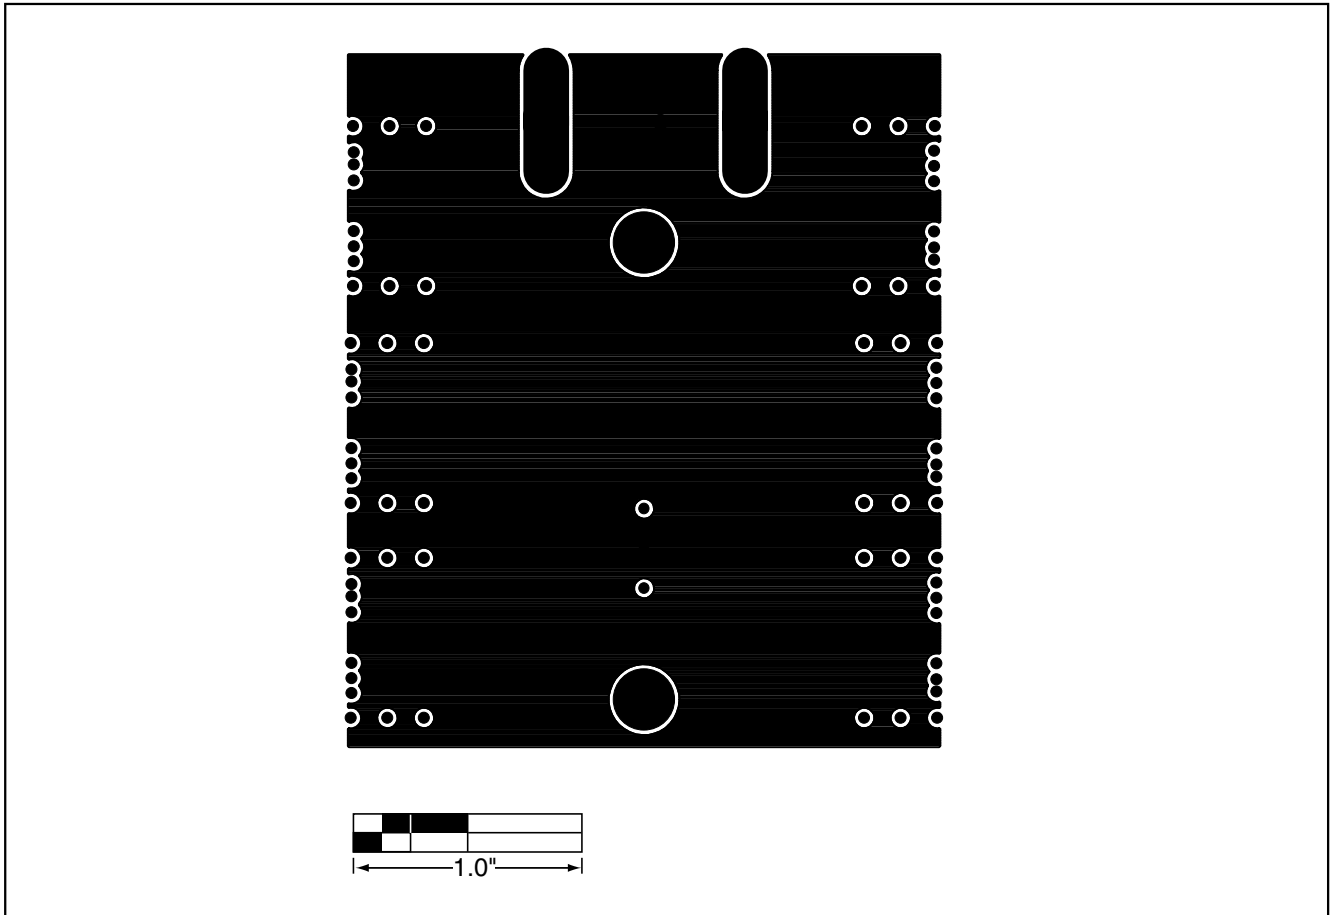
MAX3785 EV Kit PC Board Layout—Power Plane
